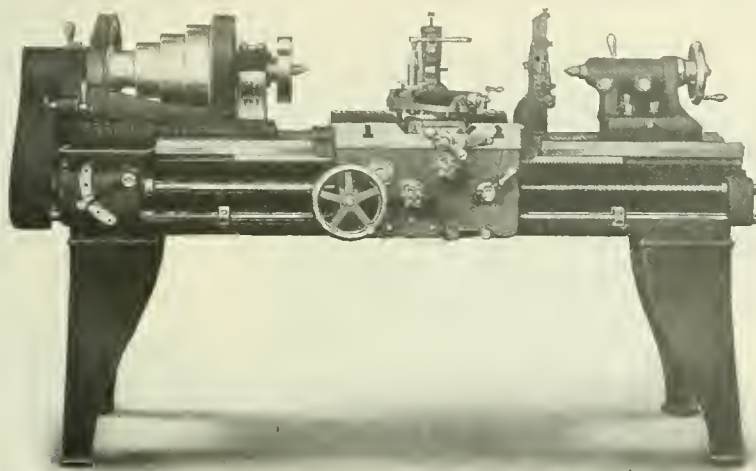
Fifteen-inch Engine Lathe built by Greaves, Klusman & Co.
